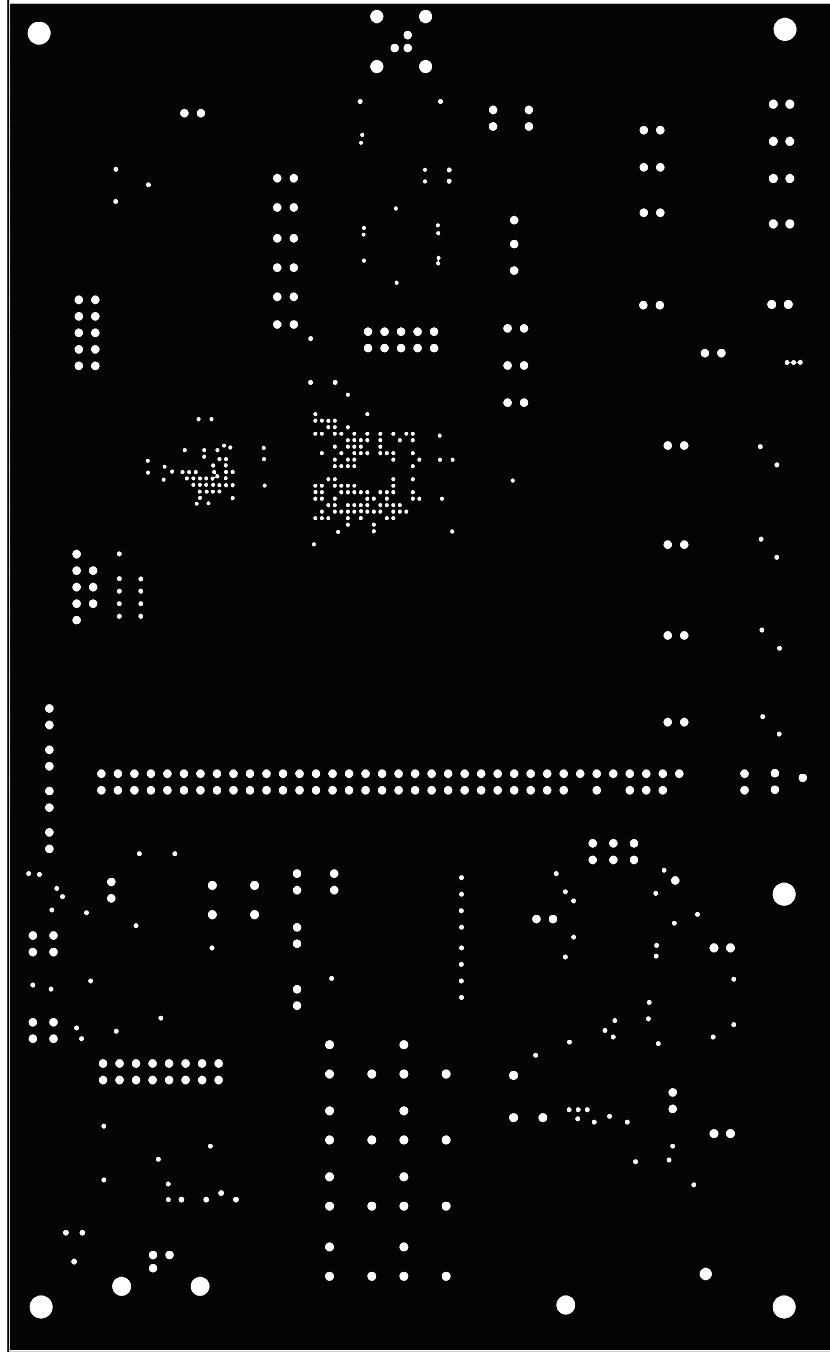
MAX9249 EV Kit PCB Layout—Ground Layer 7
